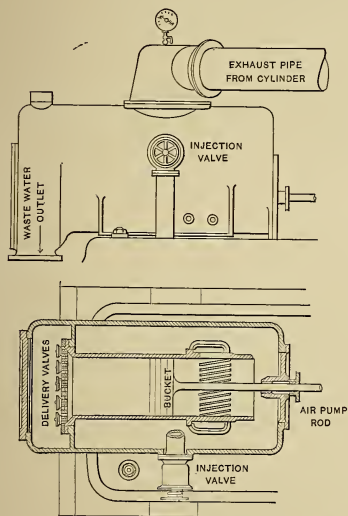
ELEVATION AND PLAN OF LONG-STROKE AIR PUMP MADE BY MESSRS. POLLIT & WIGZELL, LTD., SOWERBY BRIDGE
